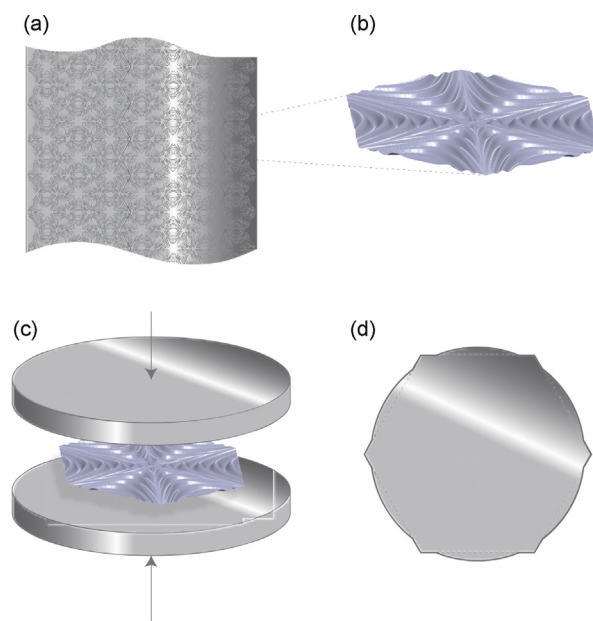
Overview of concept for ridged die forming process. (a) The uncut sheet is stamped with ridged dies; (b) tessellating pre-blanks are cut from the sheet; (c) the pre-blank is flattened between flat dies; (d) the pre-blank is transformed to the final blank geometry.
